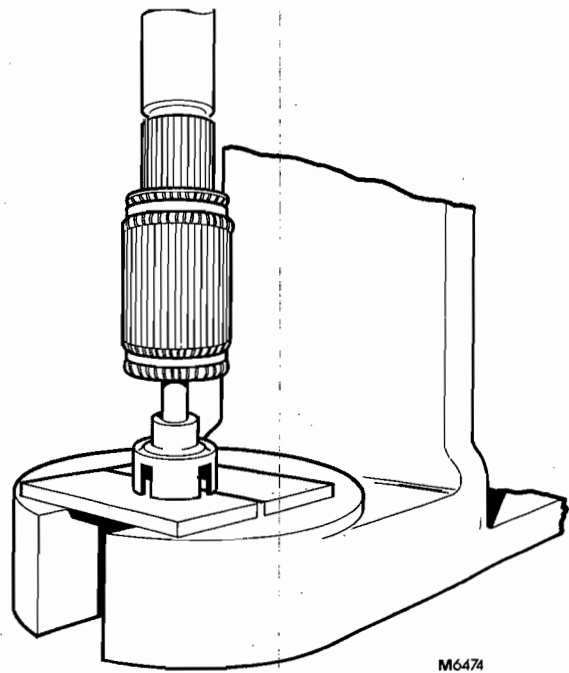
PRESSING ON THE CLUTCH OUTER RACE
